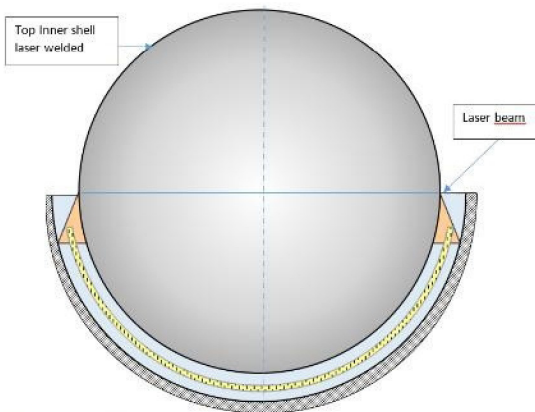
Step 2 welding of the upper inner sphere
